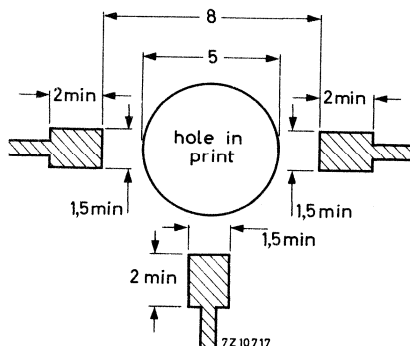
Requirements for fibre-glass print (dimensions in mm).
